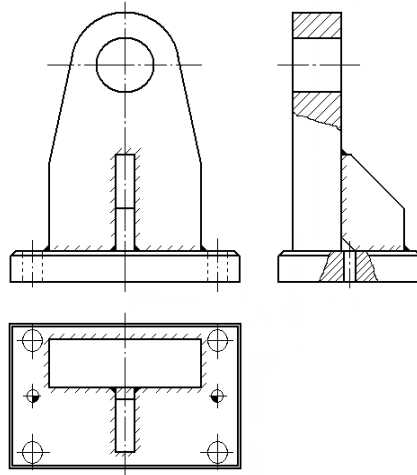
Workshop drawing of a support achieved from welded semi-products.
